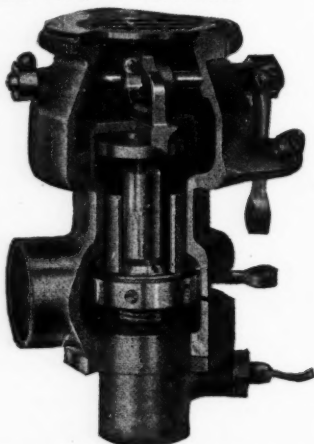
Sectional view of the Heath instrument showing the cam arrangement for operating the throttle
